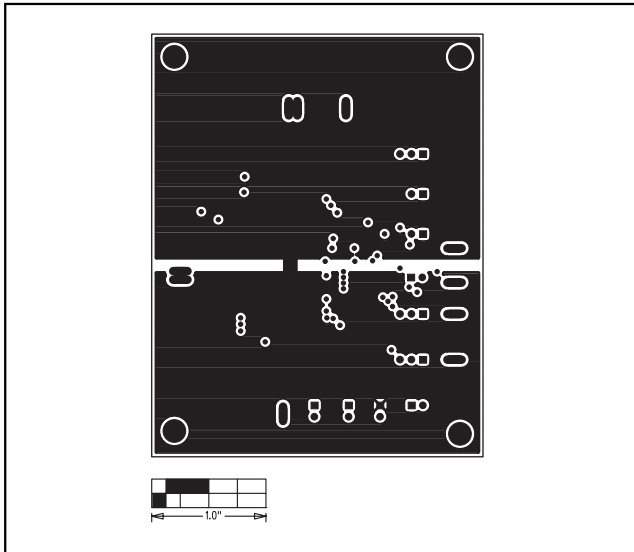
MAX1845 EV Kit PC Board Layout—Internal GND Plane (Layer 2)
